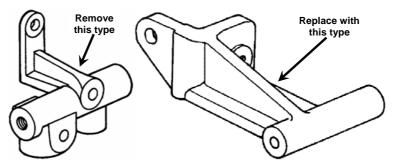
Original and Replacement Lower Alternator Mounting Brackets
